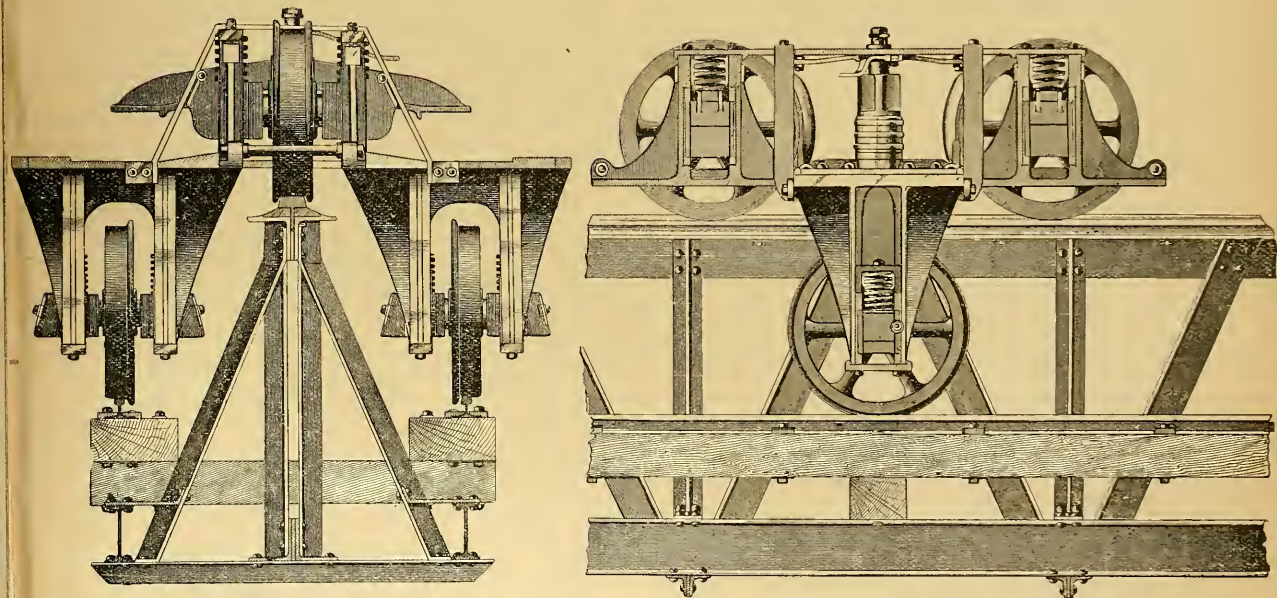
RILEY TRUCK (END AND SIDE ELEVATIONS).
